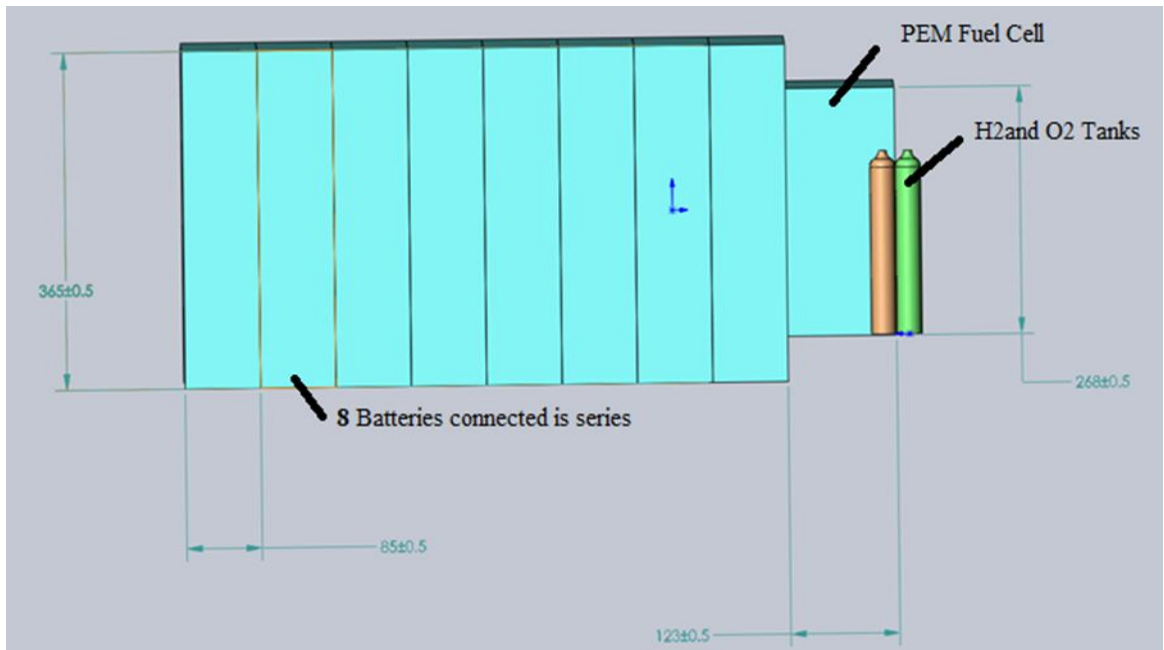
26: side view of batteries, fuel cell and tanks inside the dry section (dimensions in mm)
